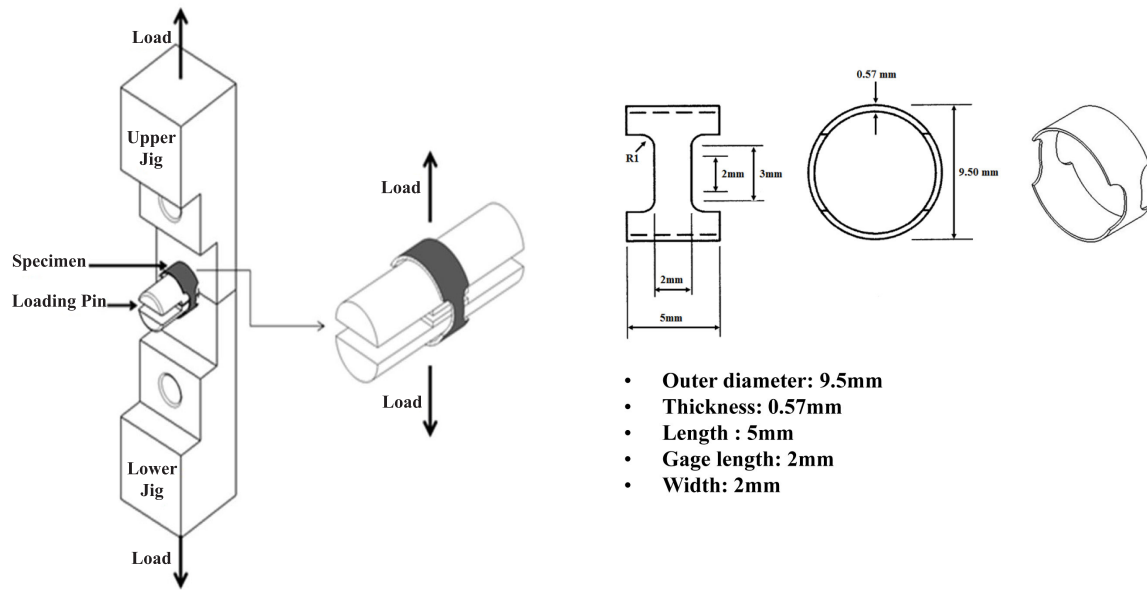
Configurations of a Ring Tensile Test Specimen and Loading Pins.
